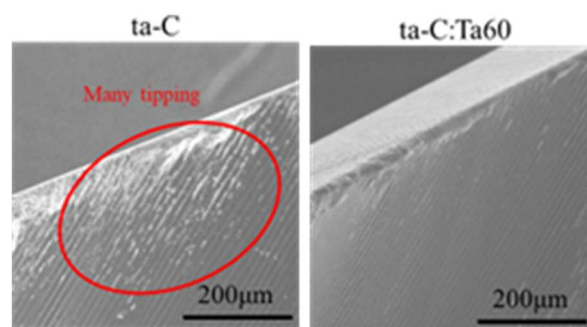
SEM images of drill rake surface after drilling 700 holes
